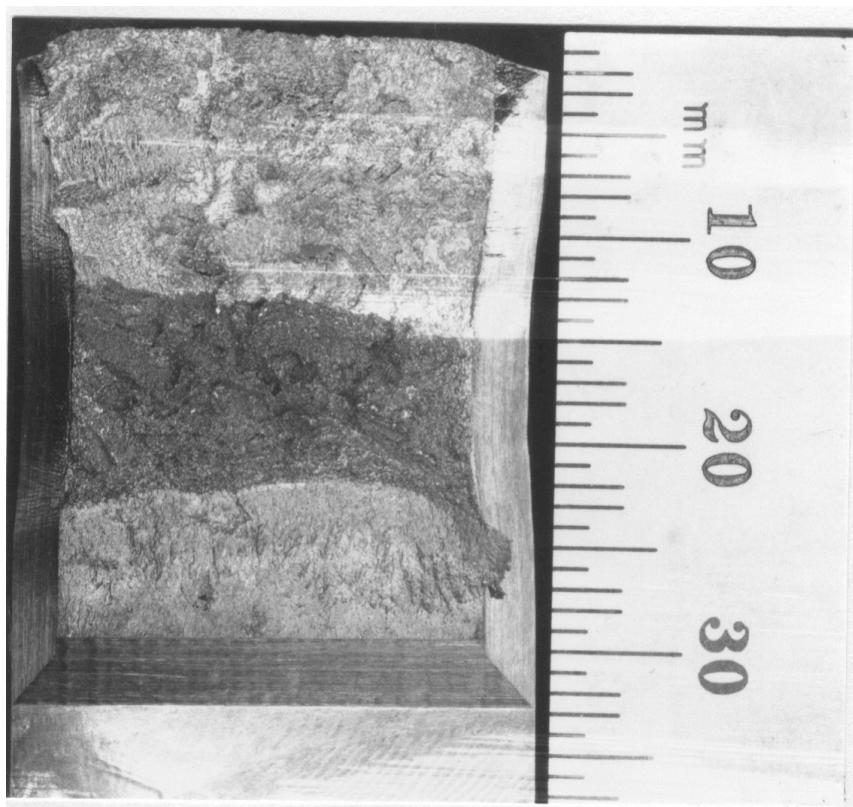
Fracture surface of service-aged material PV from the pump volute aged further for 10,000 h at 400°C and tested at 290°C
